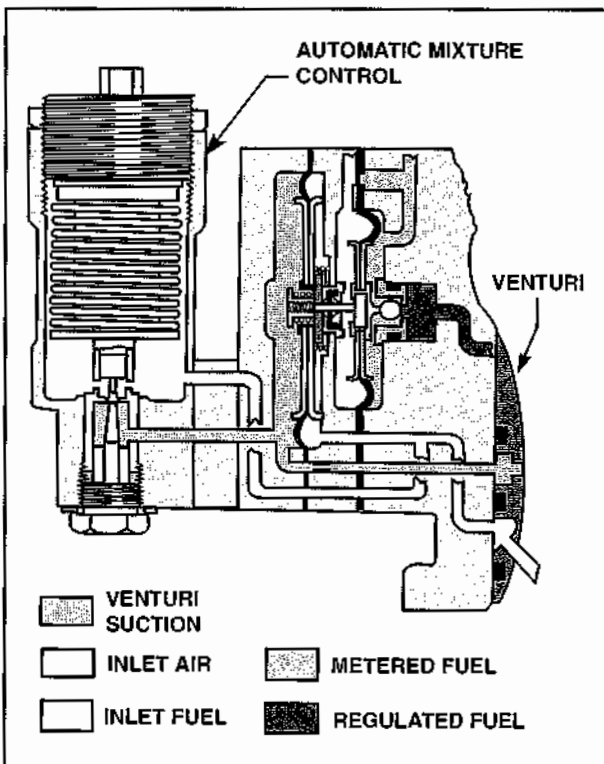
The automatic mixture control that can be installed in an RSA fuel injection system uses a pressure-sensitive bellows assembly to vary the amount of fuel delivered to an engine based on atmospheric pressure.
